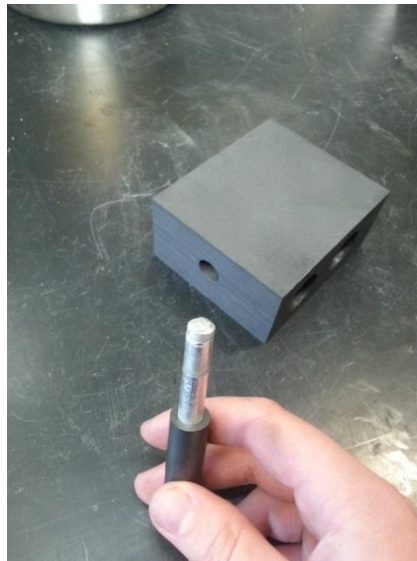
Sn plug is inserted into tube. Cement is then applied on outer surface and the part to which the tube is being cemented. The tube is then inserted in to be cured.
